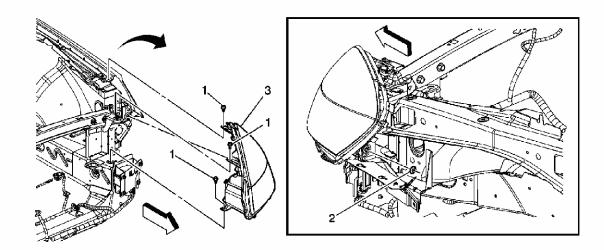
Removing/Installing Headlamp Courtesy of GENERAL MOTORS CORP.
